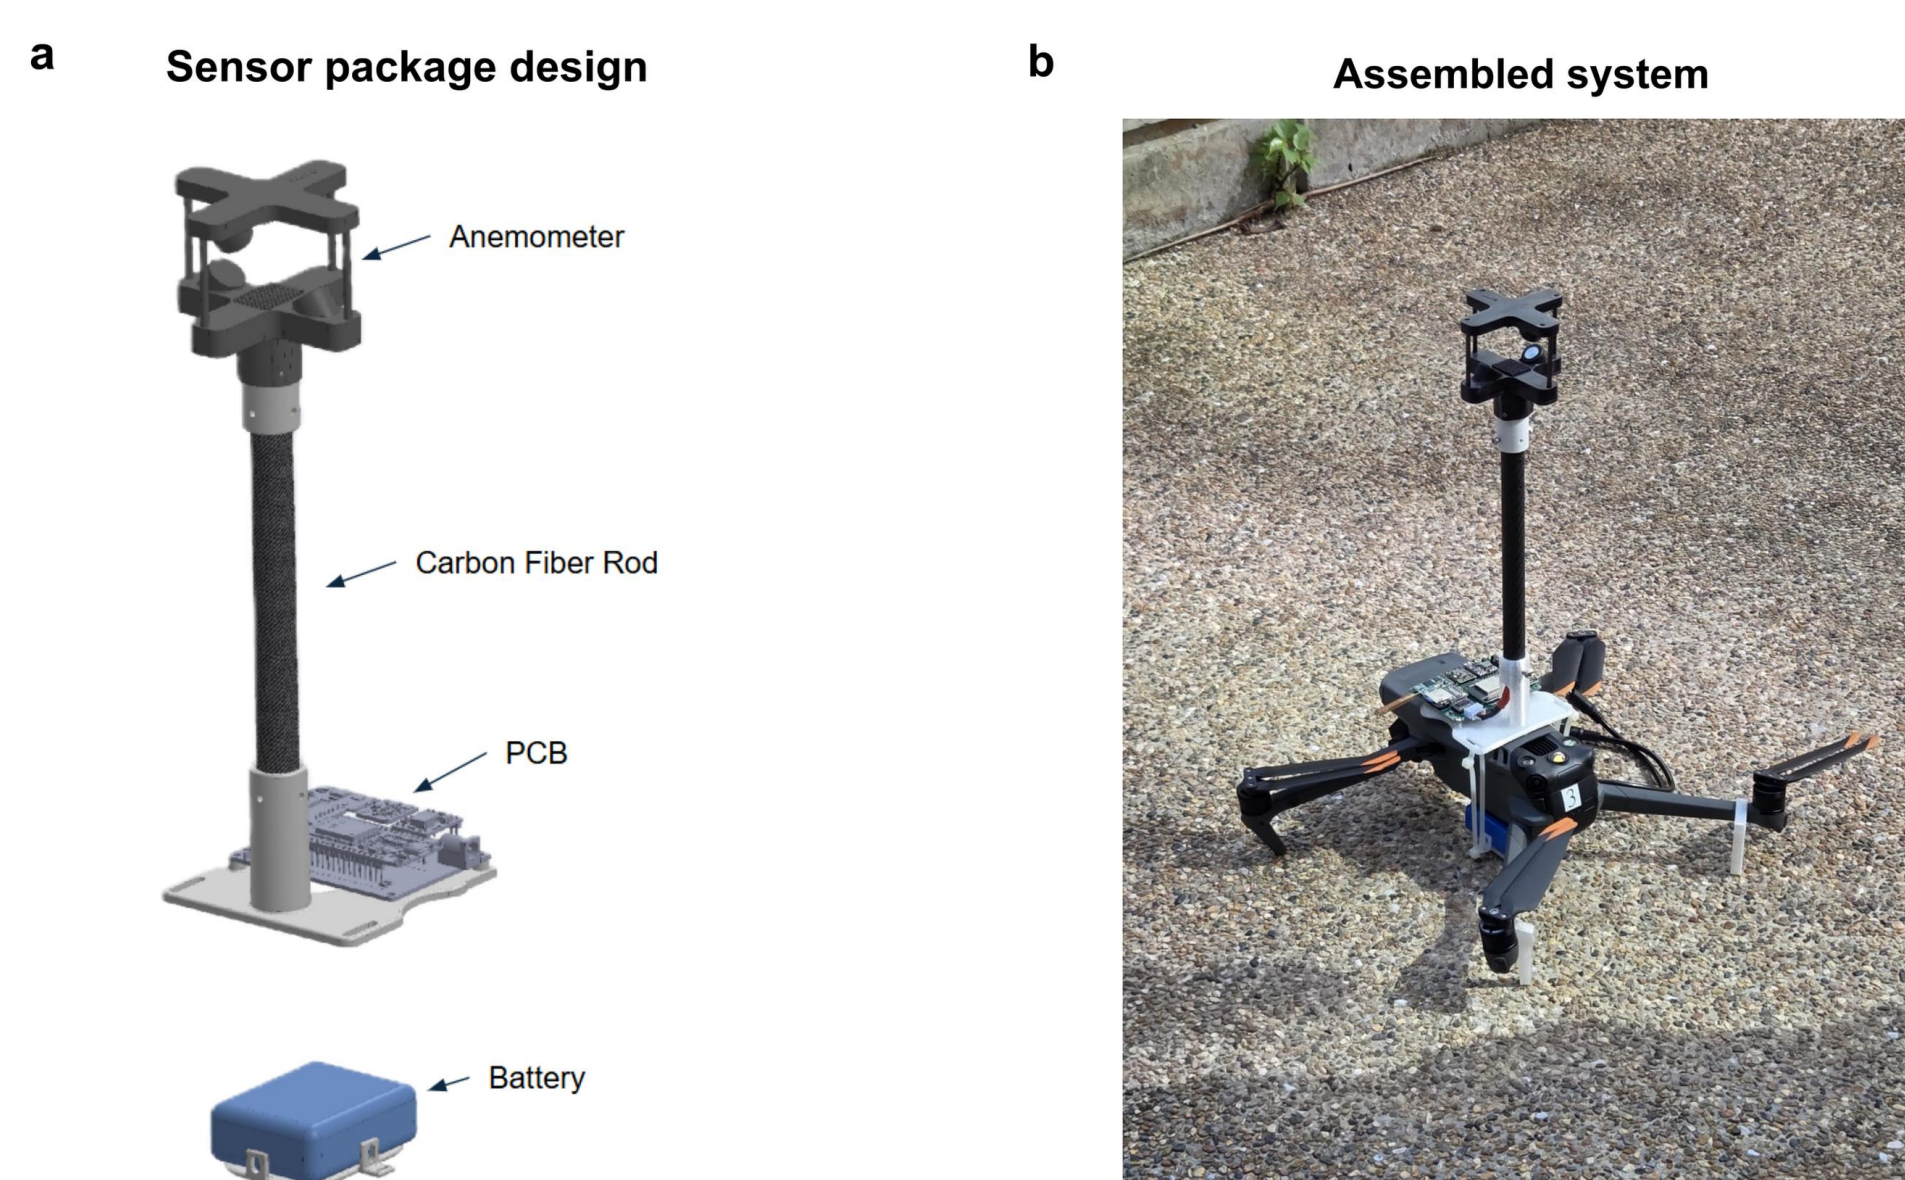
a, The sensor package: anemometer, carbon-fiber rod, custom PCB, and battery. b, The assembled system on the DJI Mavic 3E.
